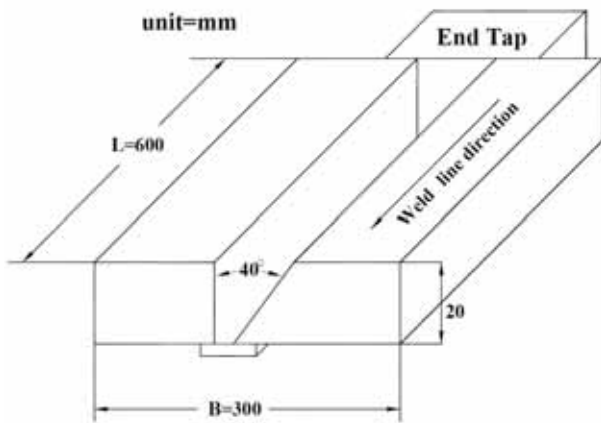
Weld Specimen Geometry and Dimensions
